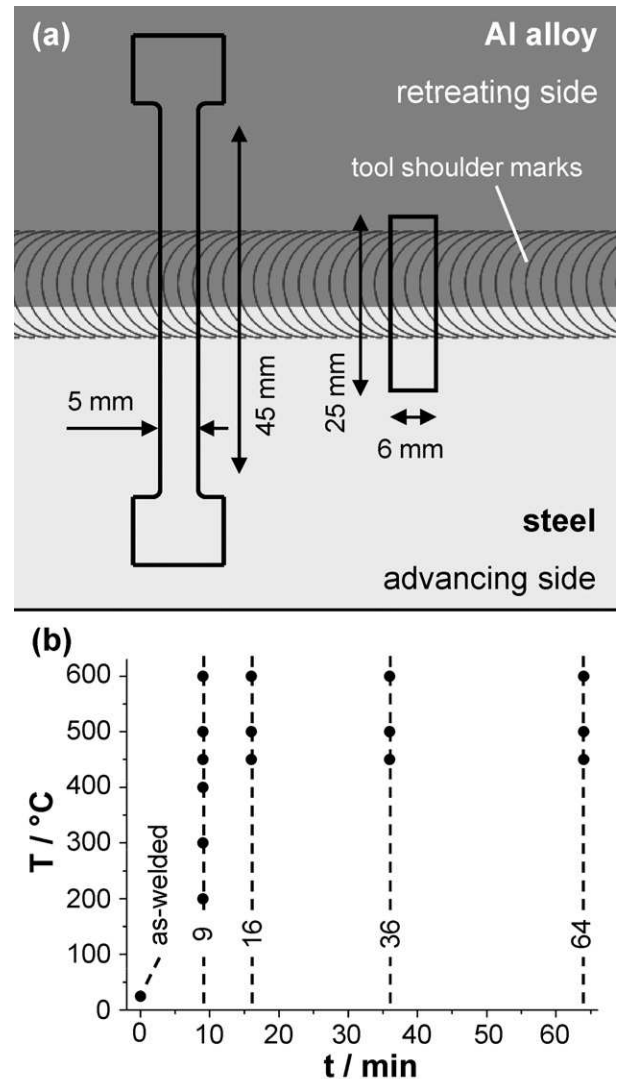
Illustrations of the sample production process: (a) sketch of the friction-stir-welded base materials and the dimension and locations of samples for tensile testing (left) and interface characterisation (right). (b) Temperature/time matrix showing the different annealing treatments applied in this study.
